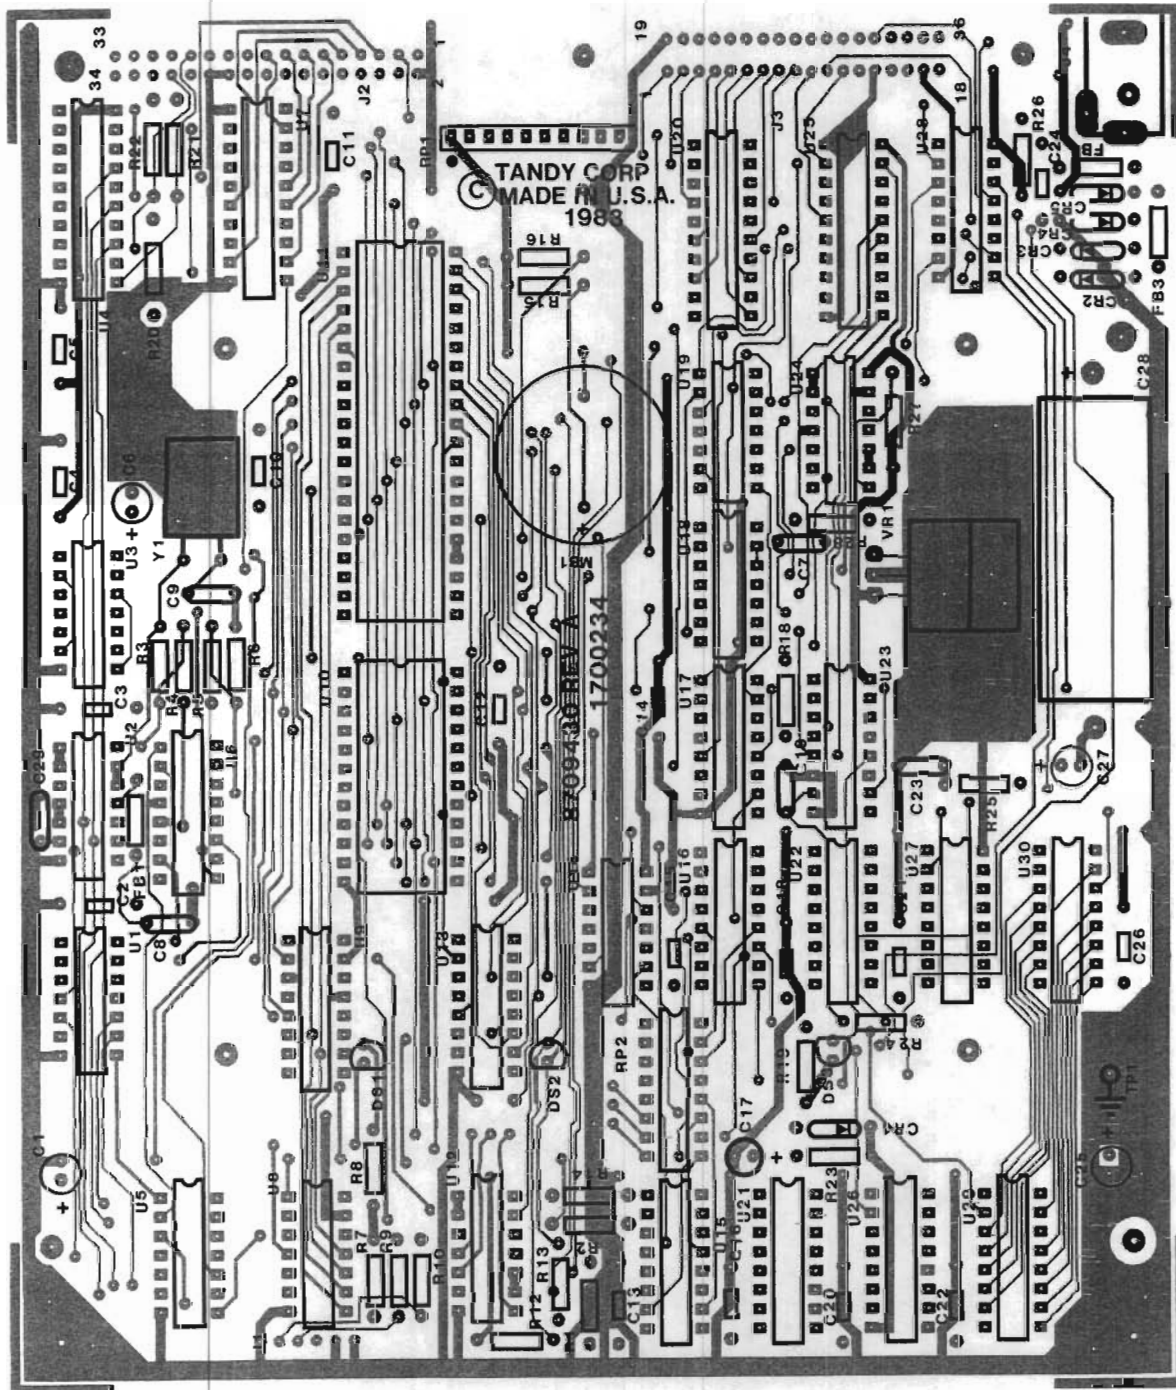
Circuit Trace, PCB Assembly 8851269
